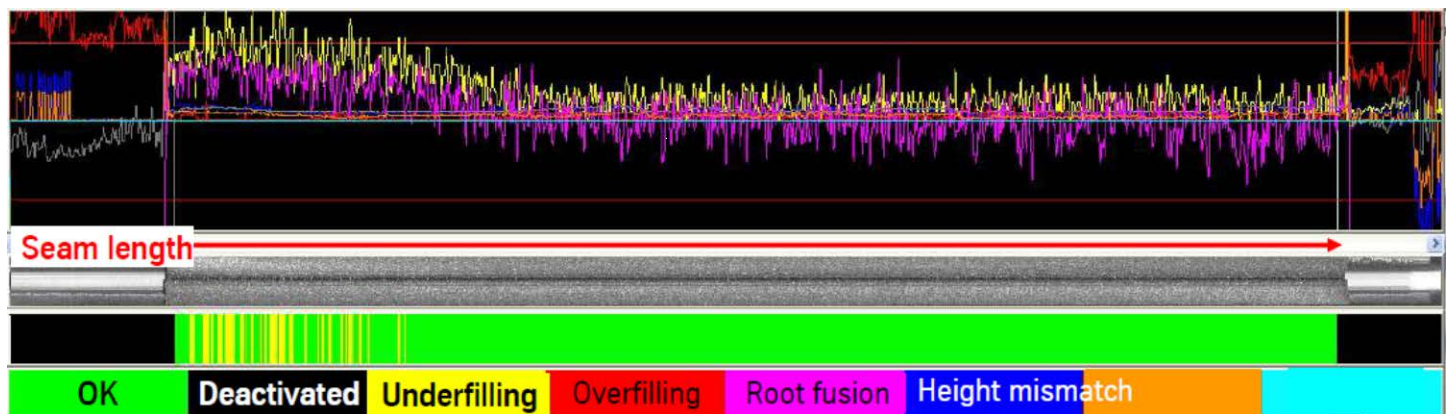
Picture of a weld seam monitored by the quality system. The left part of the weld seam shows some under filling.
